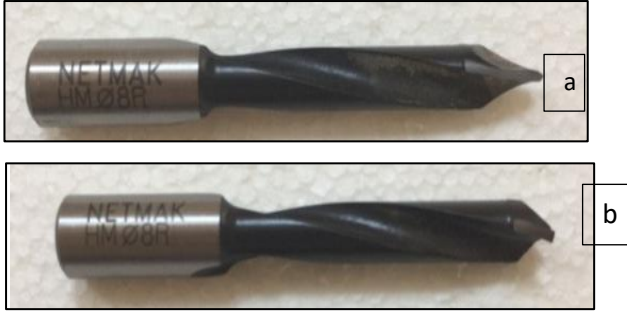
Solid carbide router cutters one flute (a) and two flutes (b) cutter types
